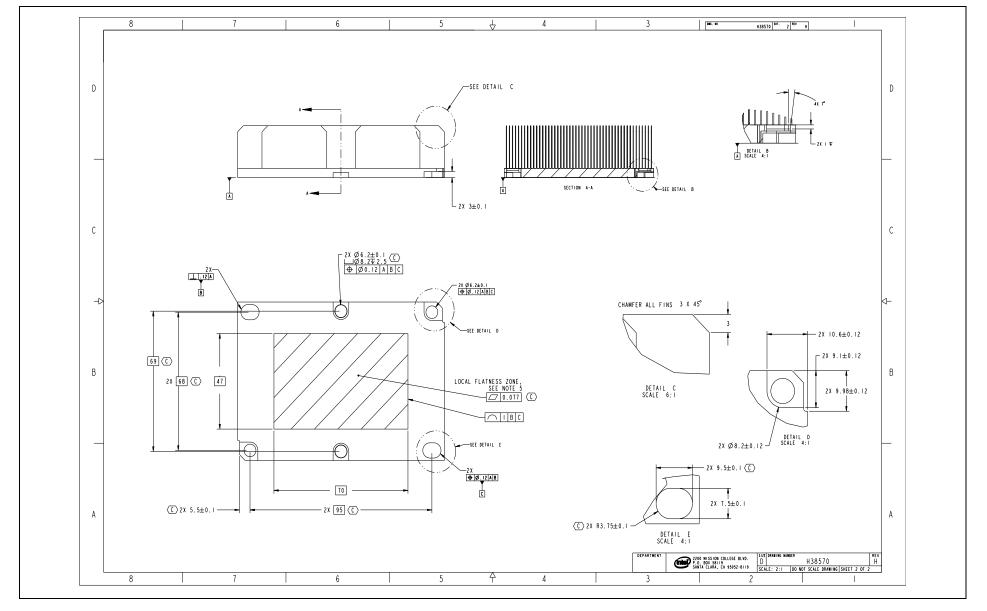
1U Extruded Heatsink Assembly (Sheet 1 of 2)
